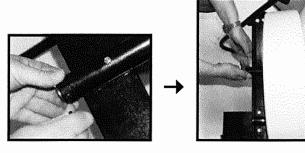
Replace and tighten lock rings on jackshaft and mixing drum shaft.
